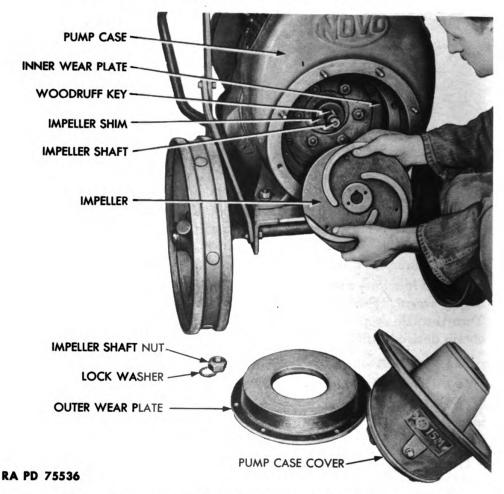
Removing Engine-driven Centrifugal Pump Impeller
